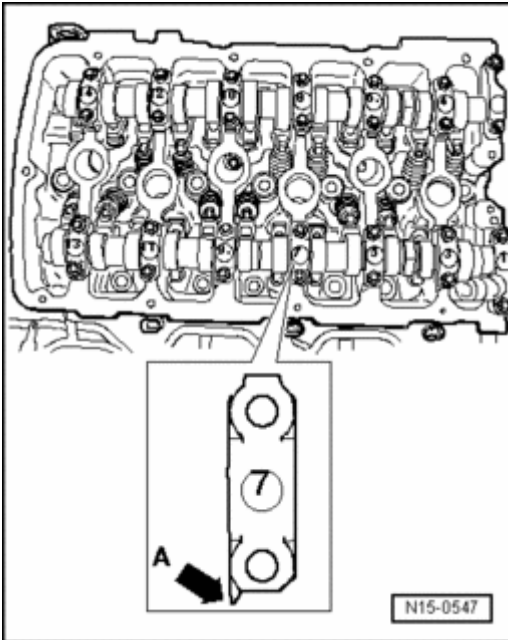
Points Of Intake And Exhaust Camshaft Bearing Cap
